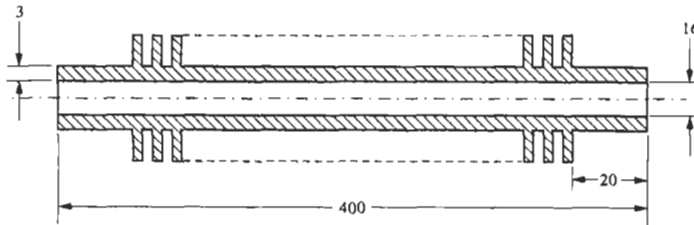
Cross-section through the heat-exchanger tube. Dimensions in mm. Not to scale.
